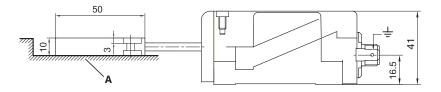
Processor BIS L-409-045-003-07-S4, dimensions in mm
